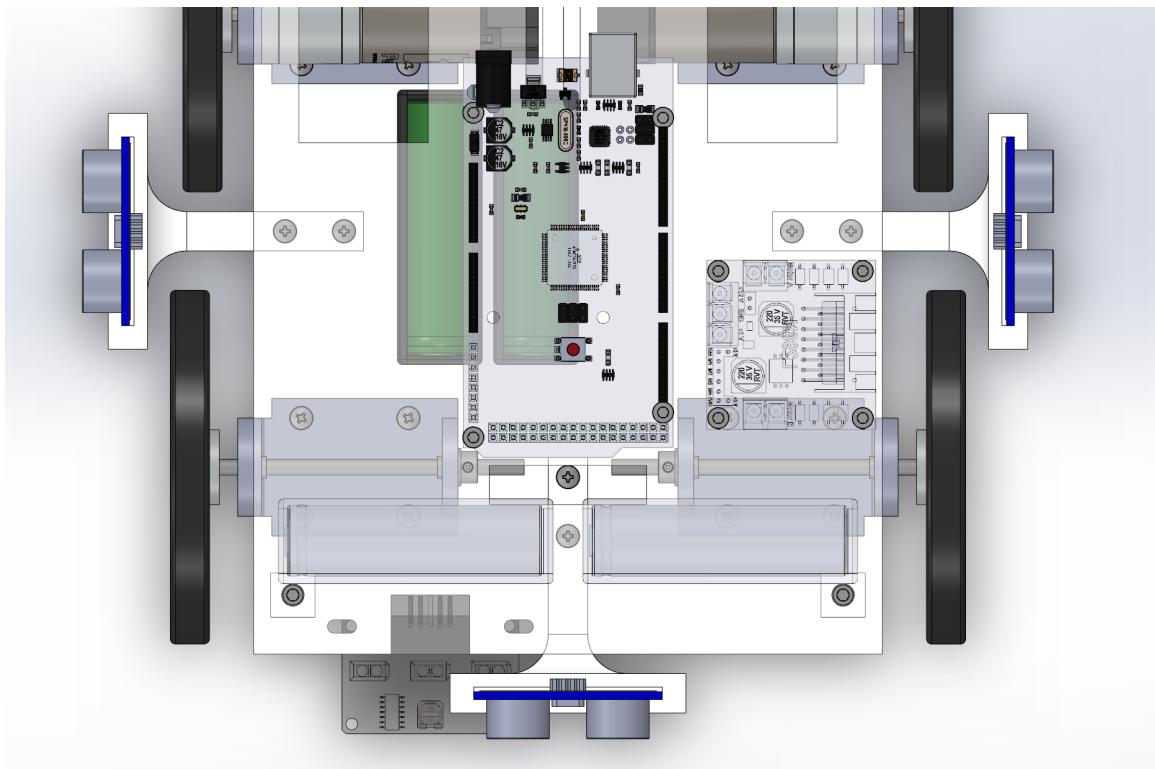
Ultrasonic sensor positions in CAD model: Two are mounted on either side of the device, one is mounted on the front
